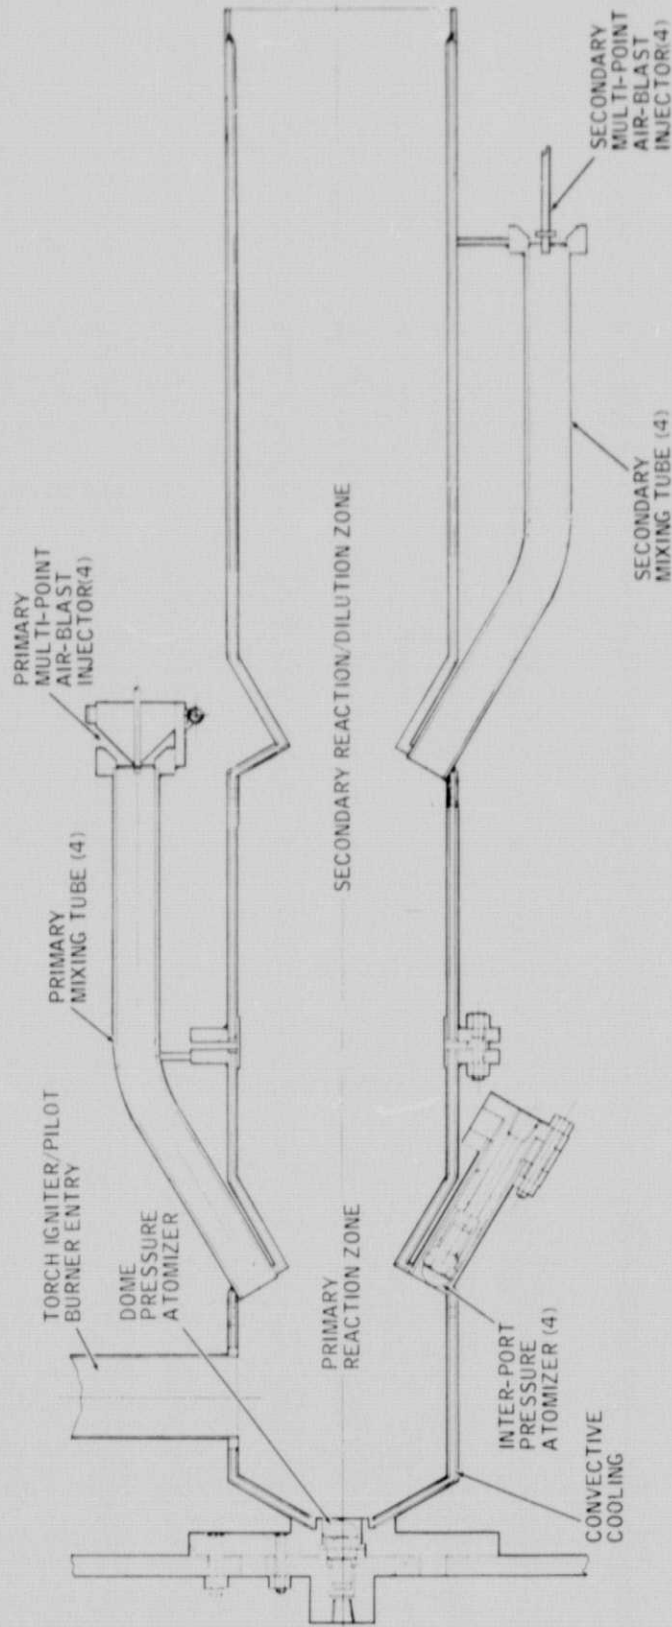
JIC Combustor Details - Axial Fuel-Staged
